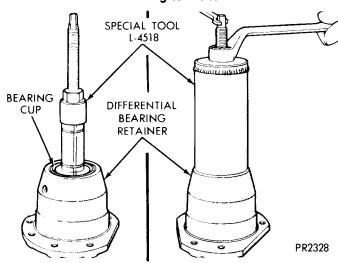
Remove Bearing Cup from Differential Bearing Retainer
